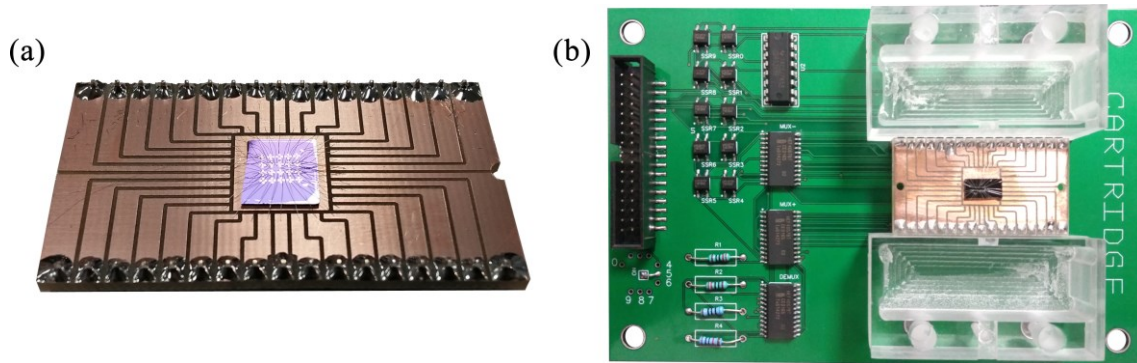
(a) A substrate with 20 devices wire bonded on to a CCL board. (b) A PCB cartridge with mounted CCL board and soldered discrete electronic components and IC chips.
